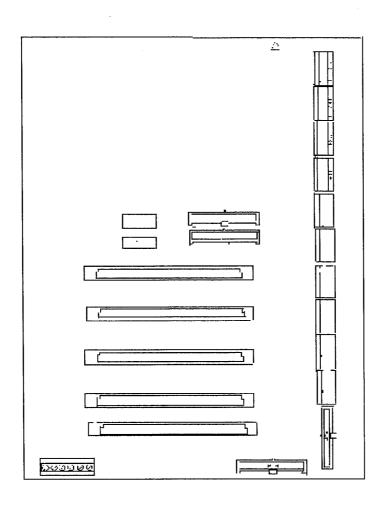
IAM-800 Expansion Motherboard P/N 976063.
